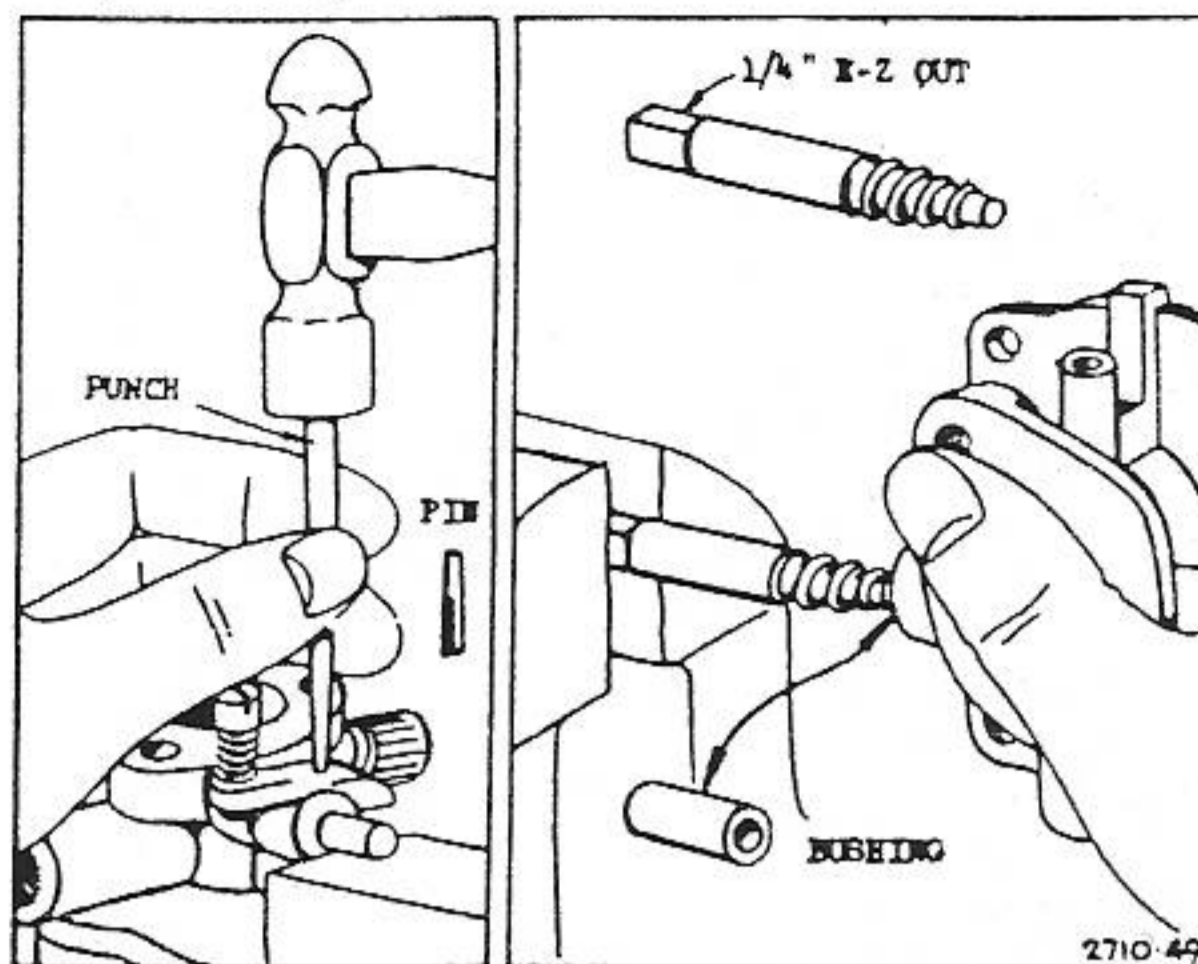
REMOVING THROTTLE STOP AND BUSHINGS
